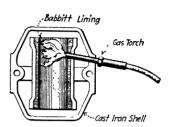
Removing the babbitt from a bearing shell by melting.
